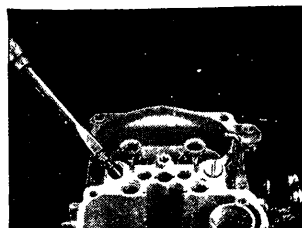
Remove both pump jet plugs and pump jets. All metering jets in dual carburetors are in duplicate. Illustrations show removal of only one
